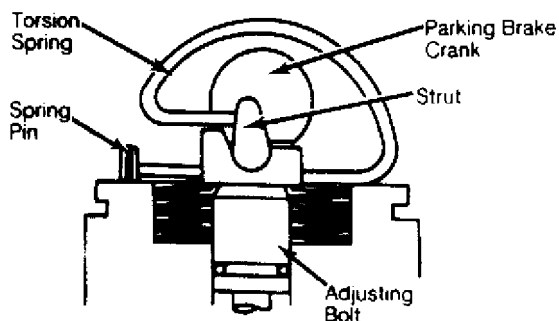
Installing Conical Spring and Adjusting Bolt on RX7 Rear Caliper
